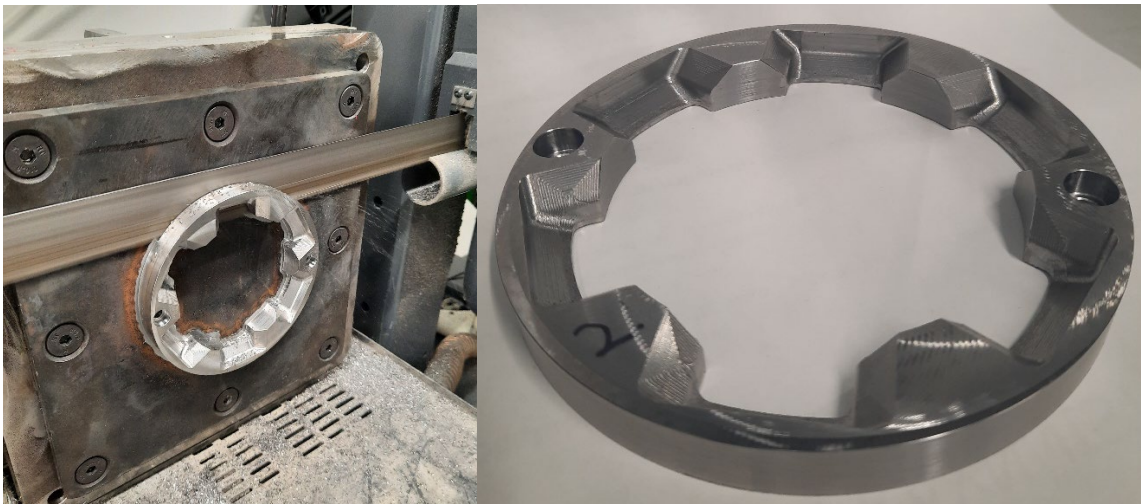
Sawing part off from build plate after 1st machining cycle and finished part after 2nd machining cycle
